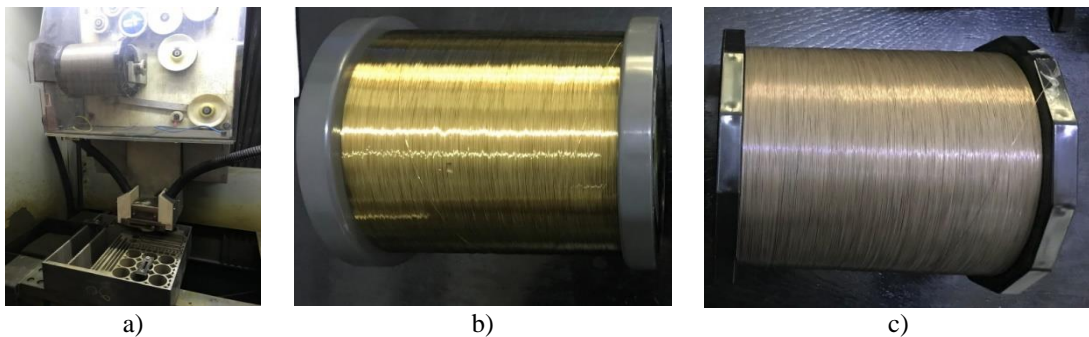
Work Materials; a) Machining centers, b) Brass Wire (E35), c) Copper Wire (SWX-25)
